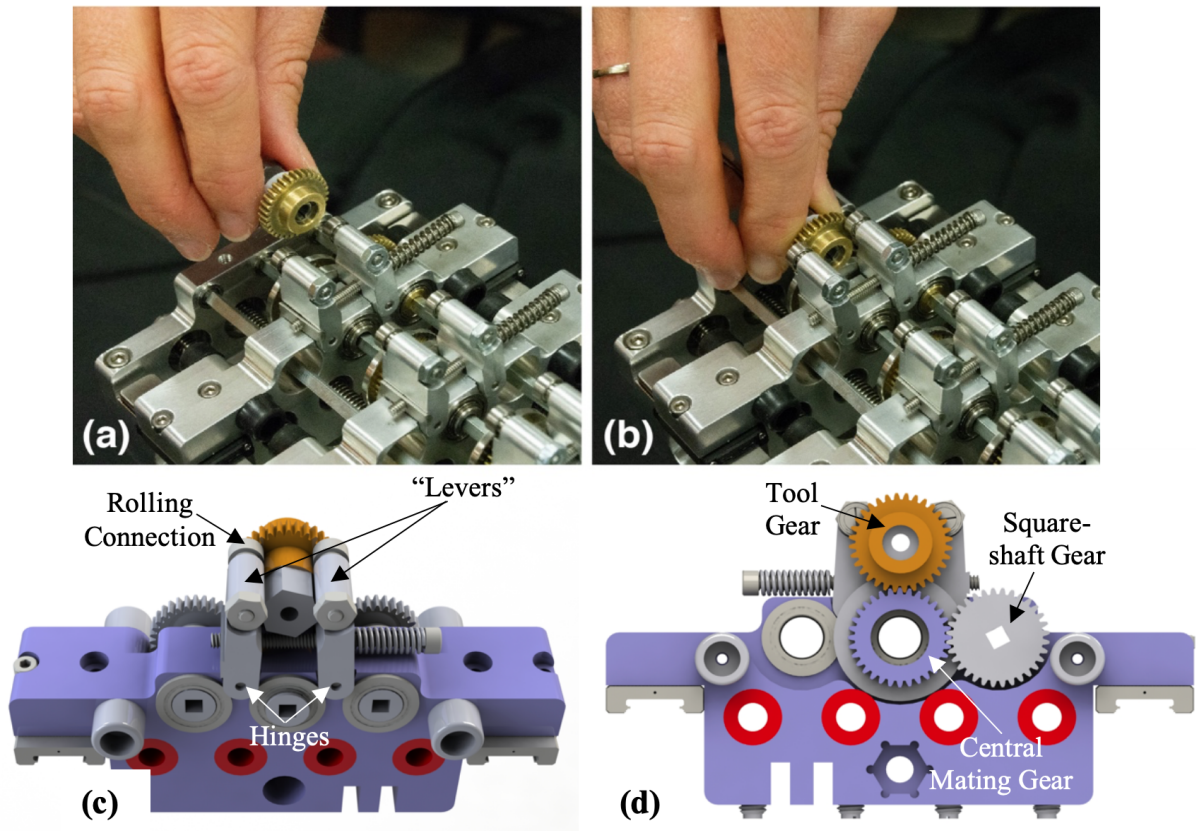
Collets that grip a given tube are press-fit into a carrier gear which can be snapped into the carriage by pre-loaded levers. The tool gear meshes with a gear assembly on the carriage to transmit rotational motion from the square shaft to the tool. Quick-connections allow for modularity and the ability for the transmission to drive a number of different customizable tools.
